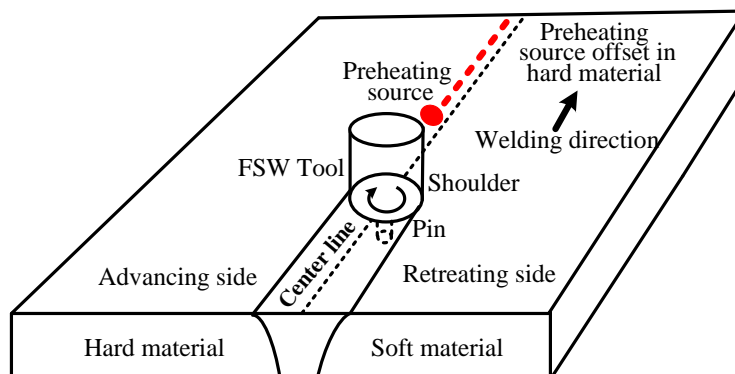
Basic principle of plasma-assisted friction stir welding of dissimilar material joint.
